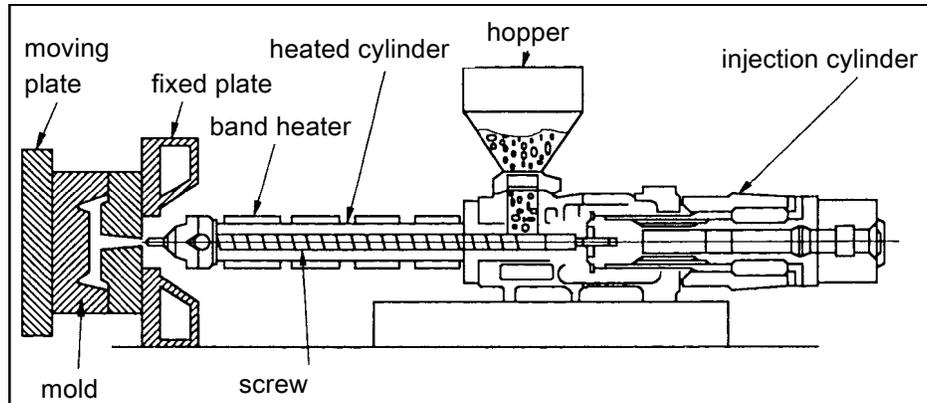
· 1—1 Theory of the in-line screw type injection molding machine
